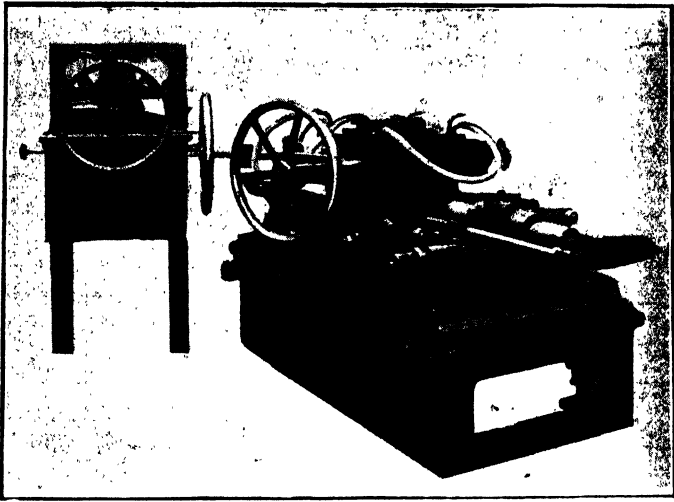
60 KW. MACHINE FOR TYRE AND HEAVY BUTT WELDING.
